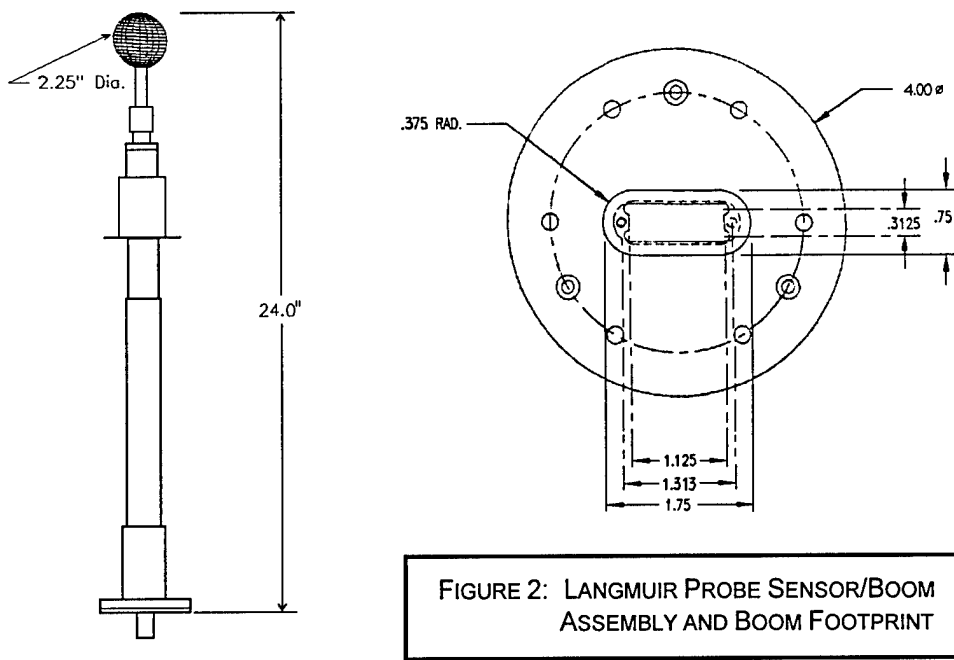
LANGMUIR PROBE SENSOR/BOOM ASSEMBLY AND BOOM FOOTPRINT
